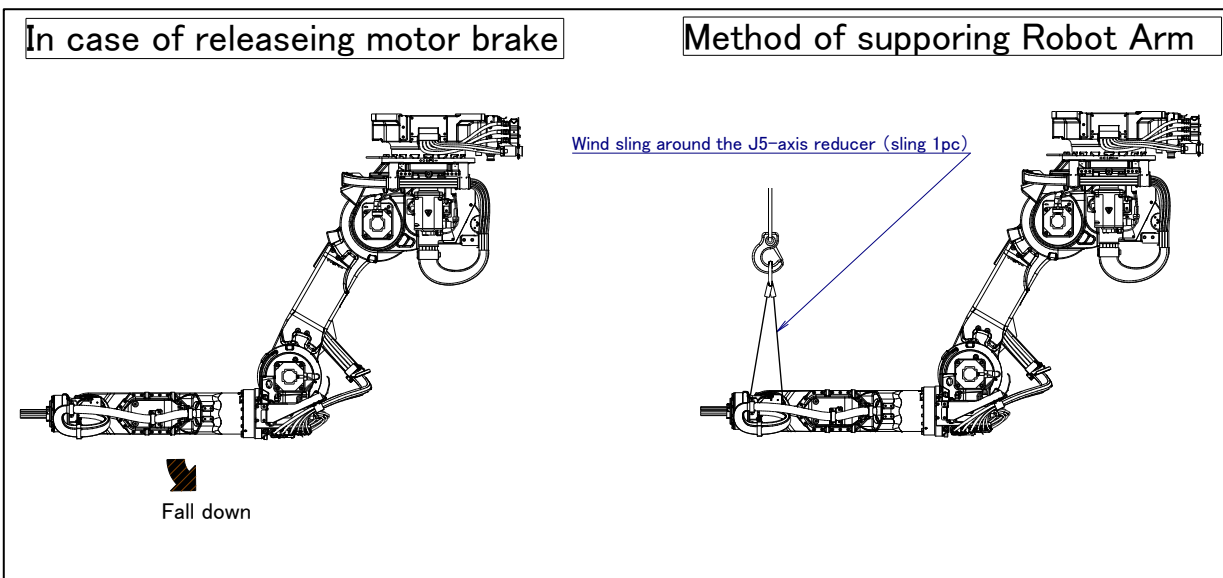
(f) Releasing J2 and J3 motor brake and measures (R-2000iB/220US)
